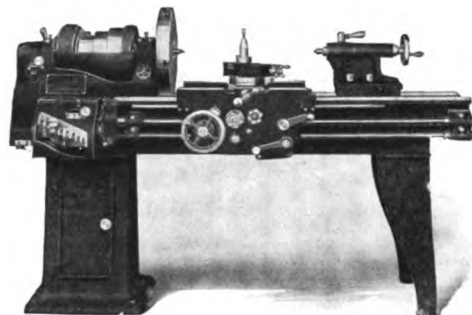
Monarch 16-Inch Quick Change Gear Lathe
